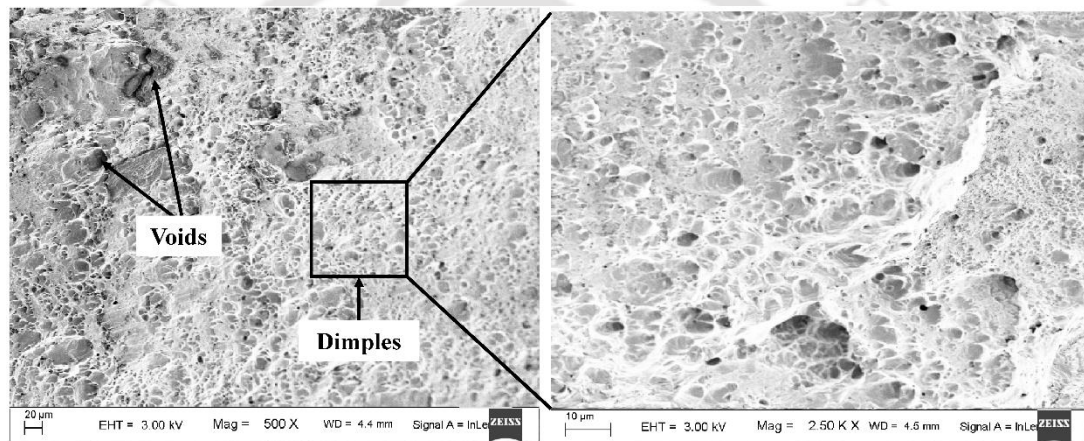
Fractured tensile specimen (friction stir welded aluminium alloy 5052-H32) at different tool rotations and welding speeds
